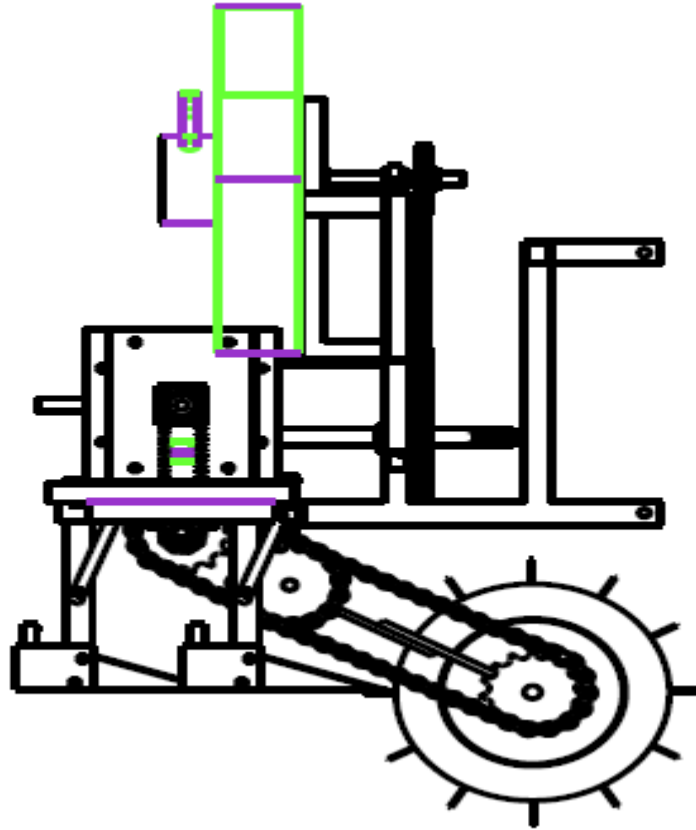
Complete assembly drawing of prototype pneumatic planter side view
